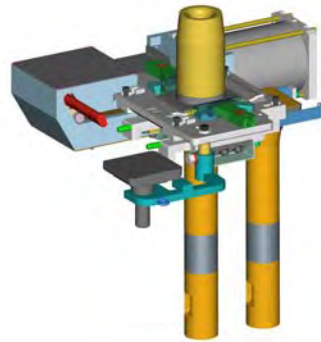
Push-bar with Pneumatic Drive = "PP" version
